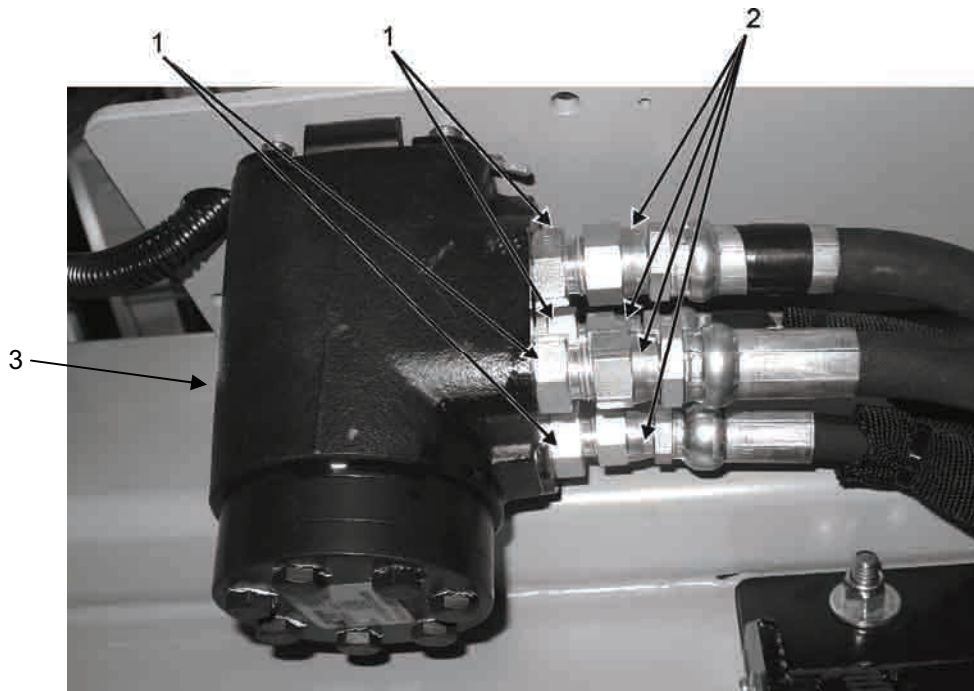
Orbital Valve (Steering) (Removal and Installation)
